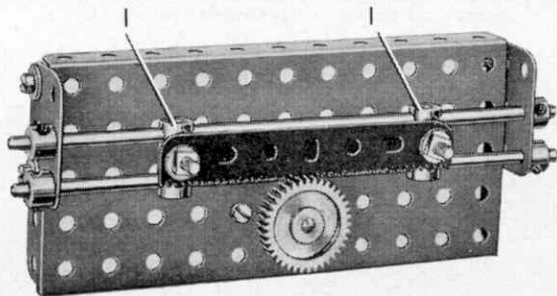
A rack and gear mechanism designed for use with a 1 in. gear.
